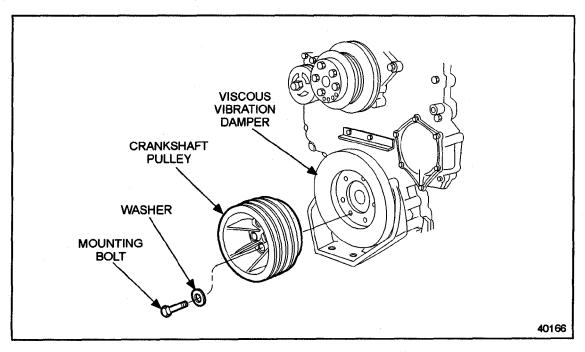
Crankshaft Pulley Mounted Directly to the Crankshaft
